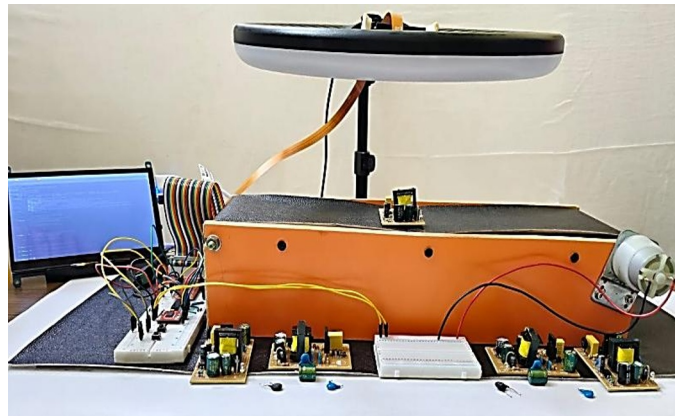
Hardware Prototype of PCB Inspection.
